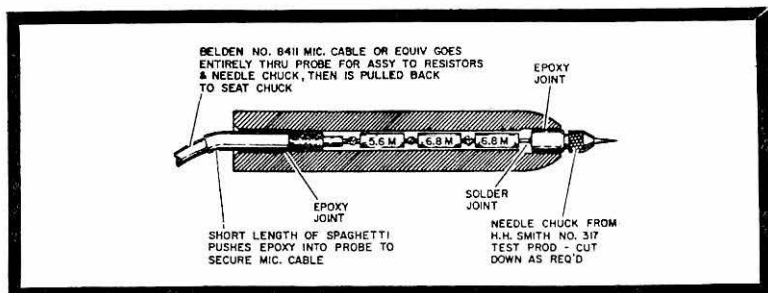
Test prod construction. Simple design is permanently assembled with epoxy cement.
